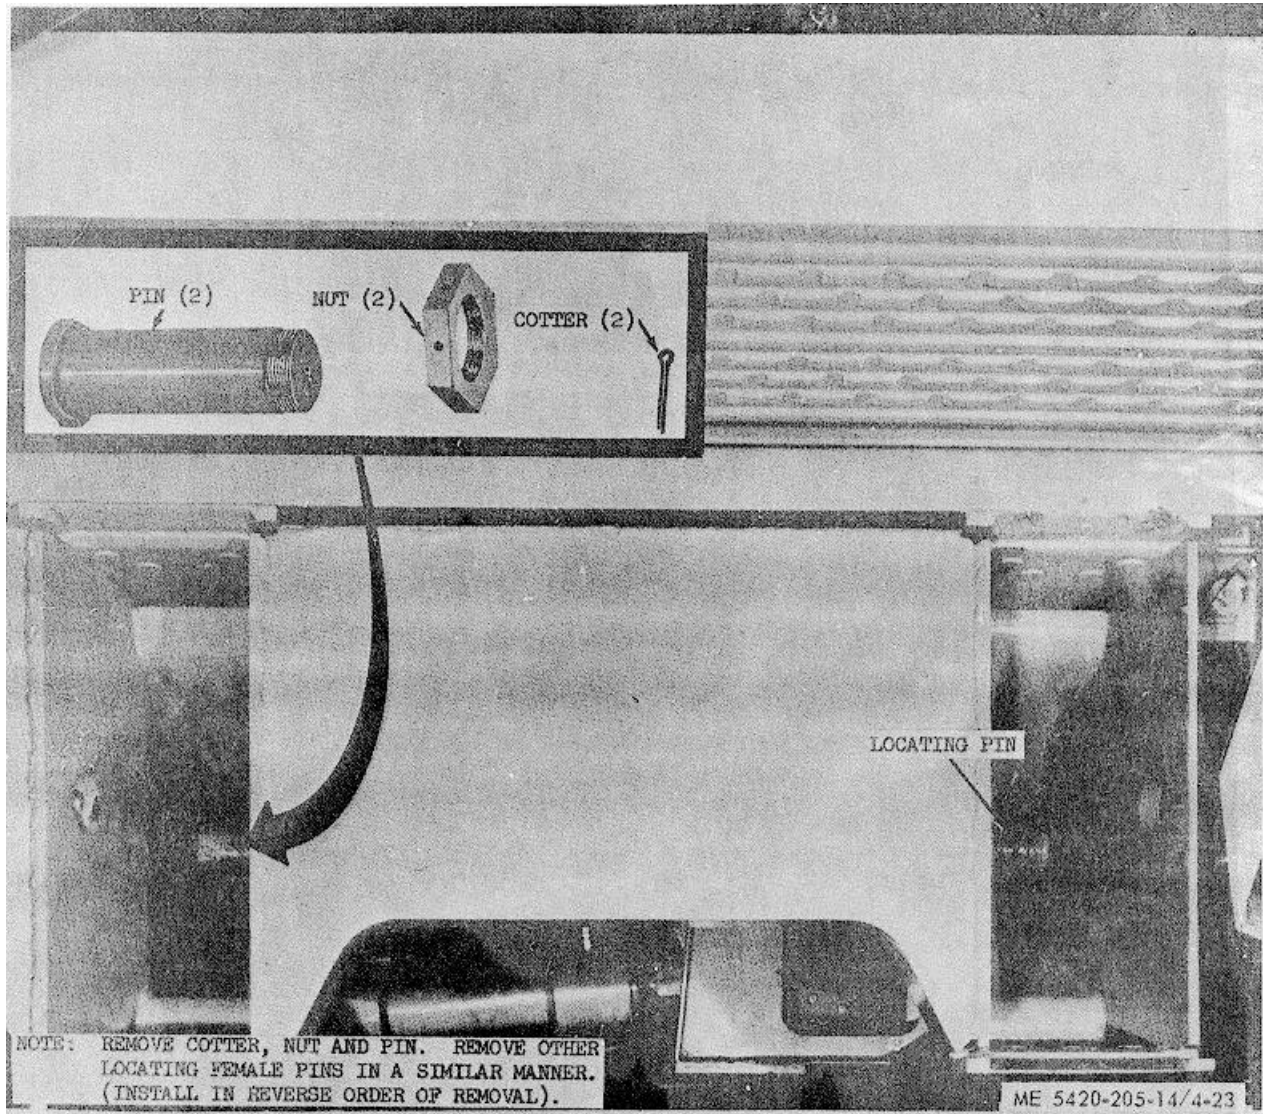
Typical tapered female locator pin assembly, removal and installation.
